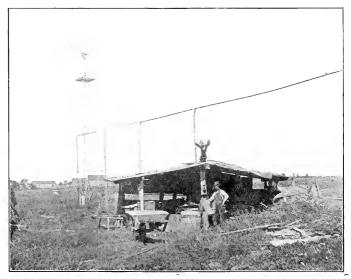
Hand moulding plant, Mouldy Bros., Kingston; one man moulds 2,000 brick per day.
